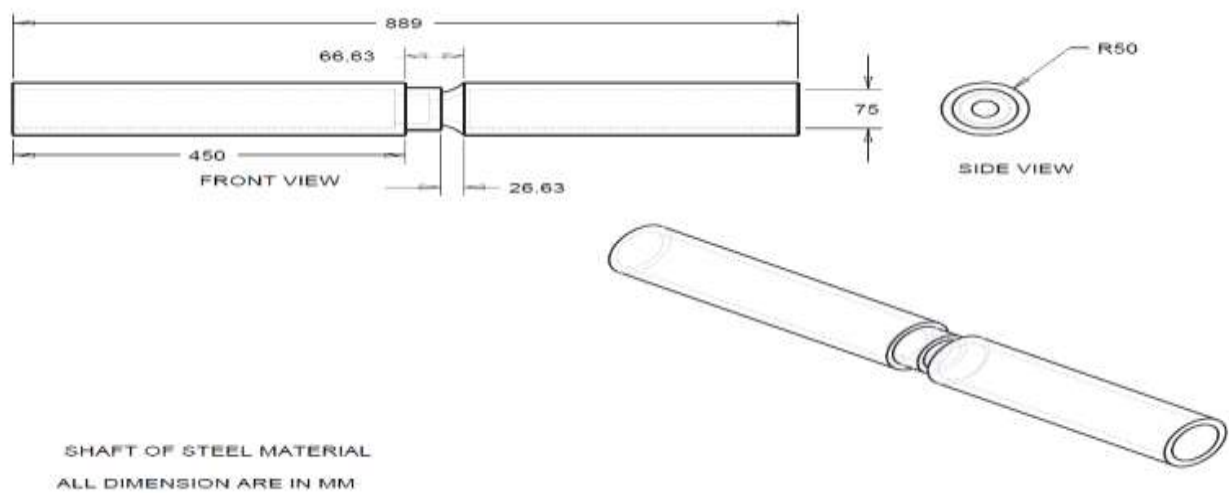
Drafting Model of Propeller Shaft for SM45C
